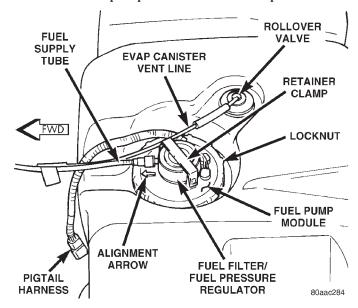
Fuel Tank/Fuel Pump Module (Top View)
